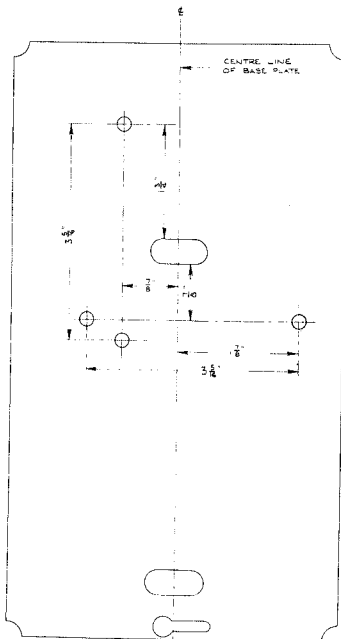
Early Production 554 Tel. Set Baseplate Mounting Holes Drilling Location
